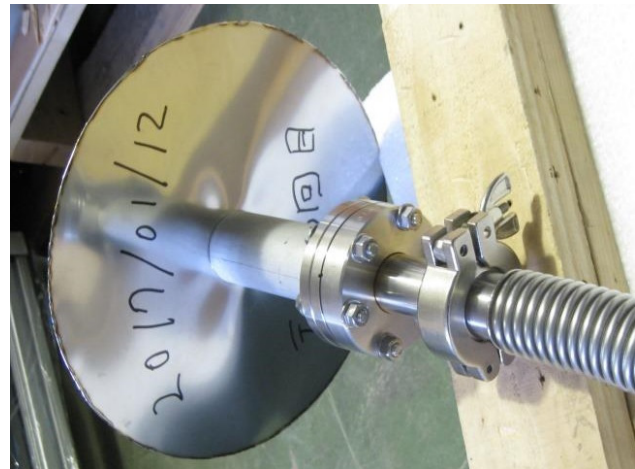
Vacuum leak test of a test piece for lip seal welding.
